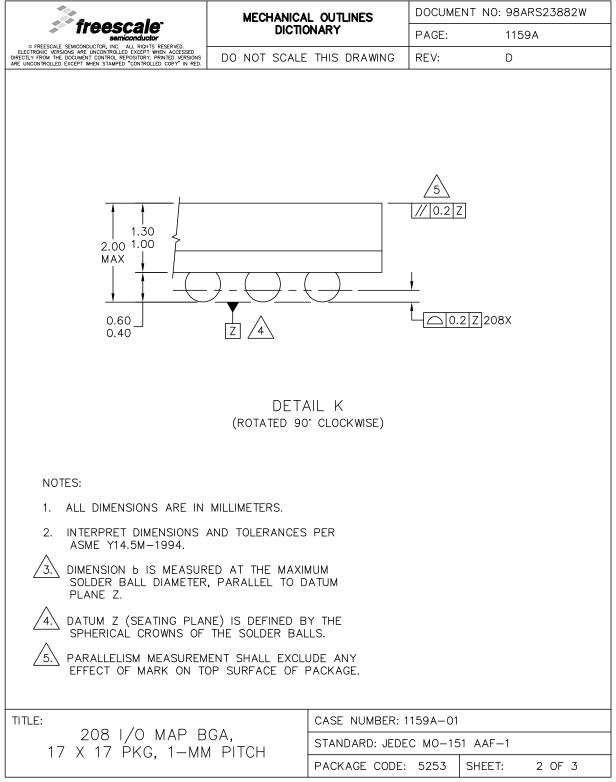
208 MAPBGA package mechanical drawing (part 2)
